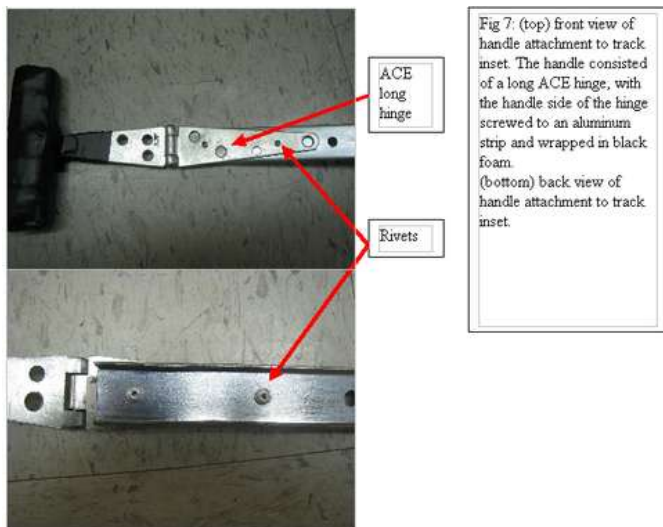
(top) front view of handle attachment to track inset. The handle consisted of a long ACE hinge, with the handle side of the hinge screwed to an aluminum strip and wrapped in black foam. (bottom) back view of handle attachment to track inset.
